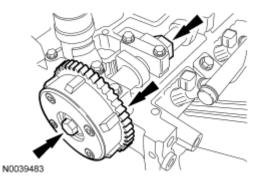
Locating Intake Camshaft Phaser And Sprocket Bolt Courtesy of FORD MOTOR CO.
